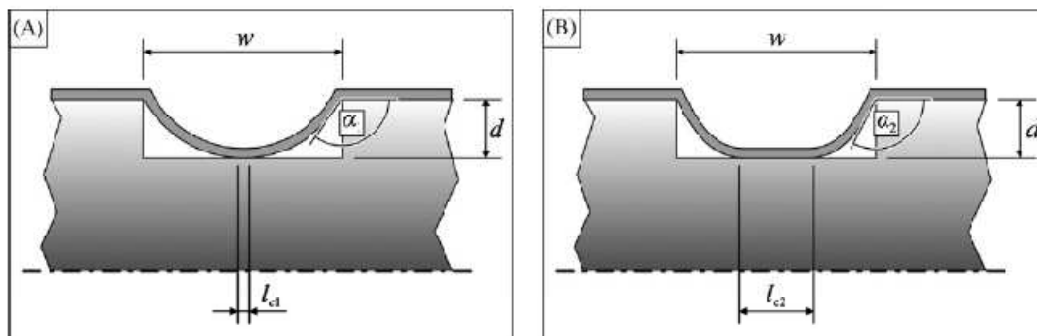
(A) A joint manufactured with a minimal necessary charging energy to fill the groove. (B) A joint manufactured with a higher charging energy [5]
